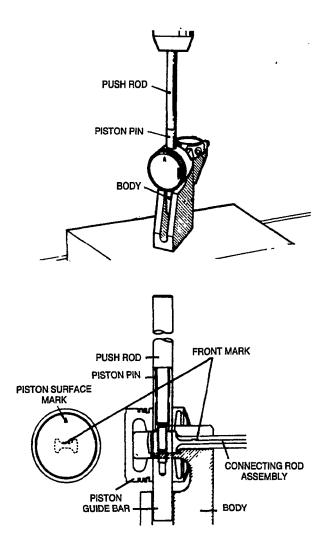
ASSEMBLING PISTON AND CONNECTING ROD
